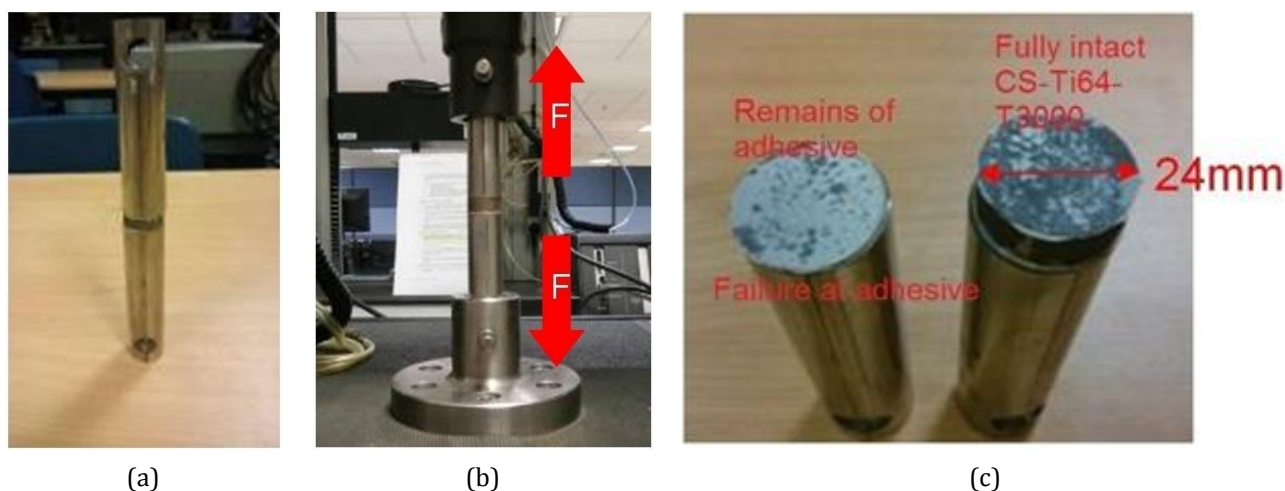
(a) Assembled set including CS-Ti64-T3000 coated sample bonded with two fixtures using adhesive glue before test, (b) tensile bond strength test, and (c) disassembled set with adhesive failure only at adhesive after test.
